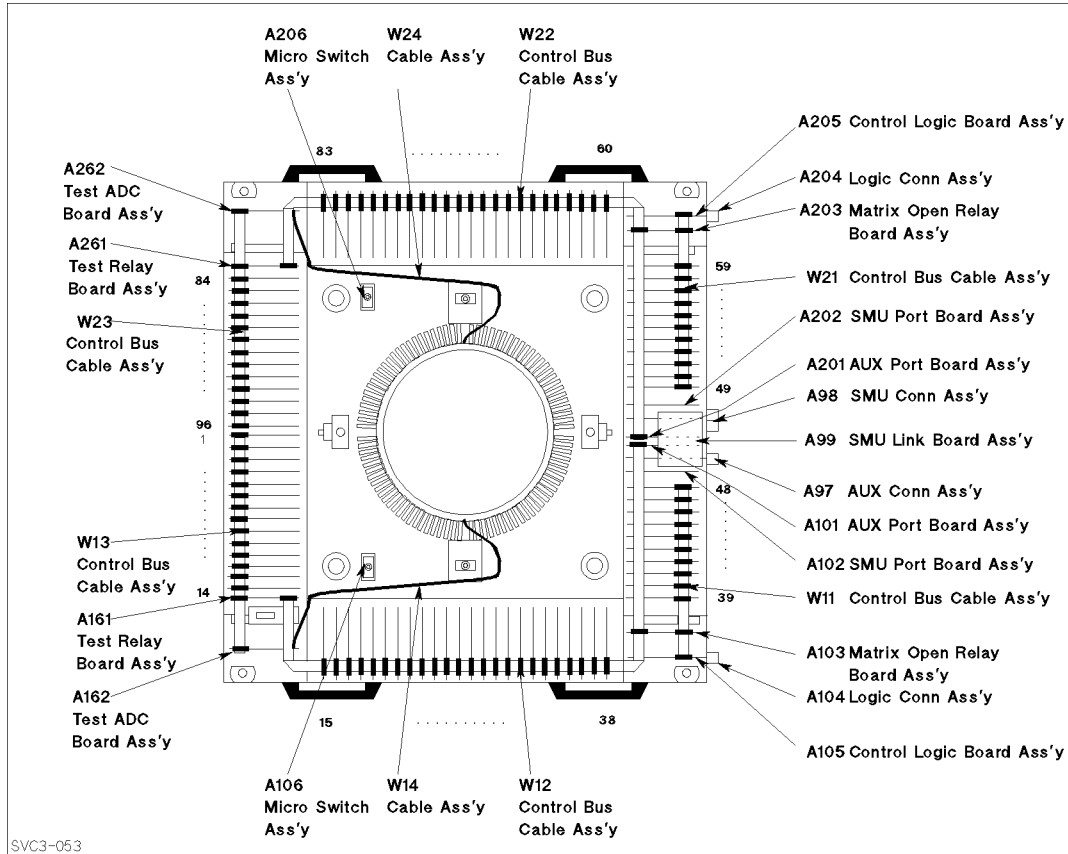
Assembly Locations in the HP 4089A/B 96-pin SWM
